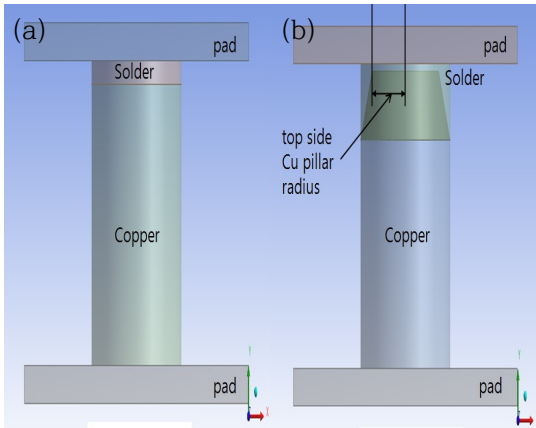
(a) Conventional copper pillar bump structure and (b) trapezoidal cross section top surface copper pillar bump structure.
